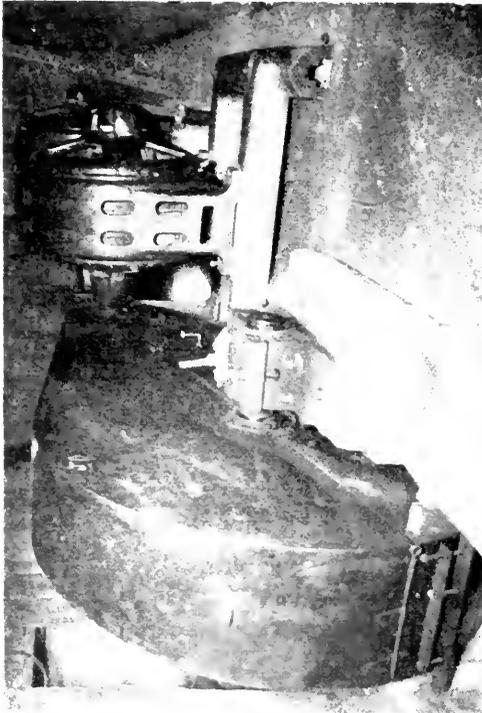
Motor Chain Drive of One of the Polishing Machines
